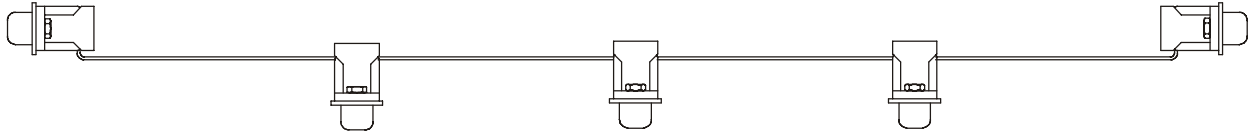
CBL-VC-PBX/EXP Cable, Side View
